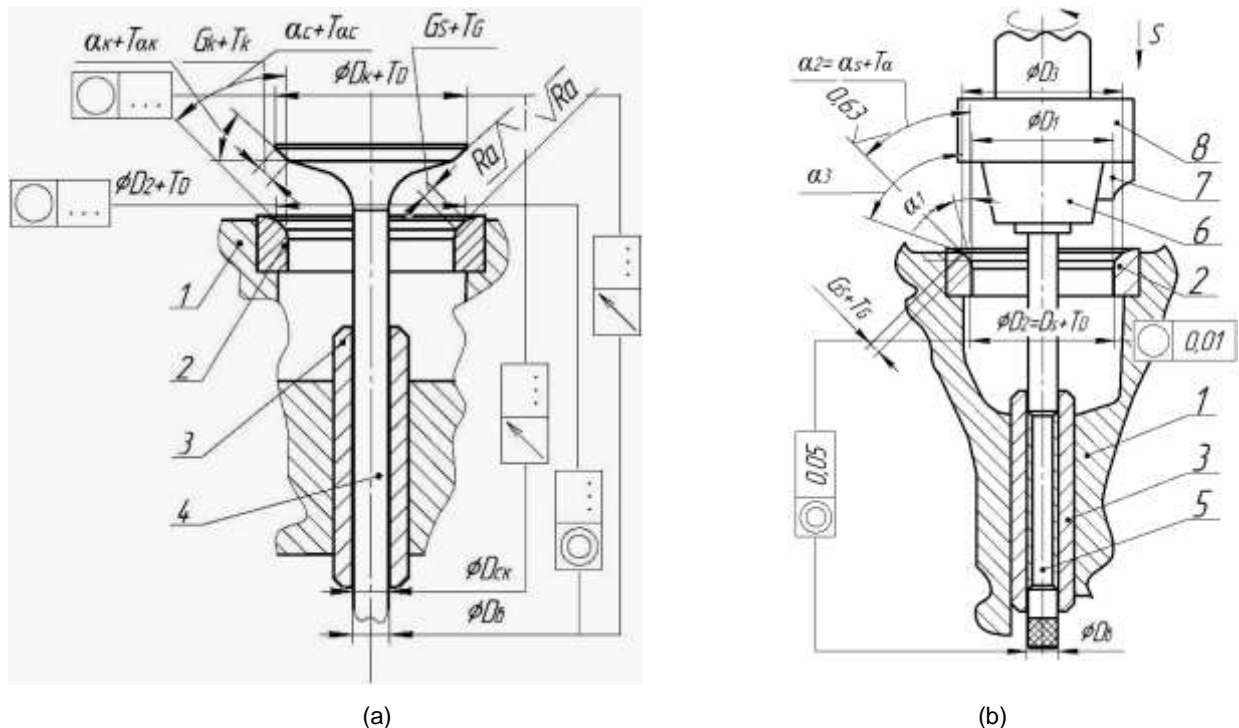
The quality parameters of the contacting surfaces in the conjugation bush-valve-seat (a), the scheme of the valve seat machining (b) / Параметры качества сопряжения поверхностей втулка-клапан-седло (а), схема обработки седла клапана (б): 1 – ICE body / блок ДВС; 2 – valve seat / седло клапана; 3 – valve bush / втулка клапана; 4 – valve / клапан; 5 – pilot / пилот; 6 – spindle / шпиндель; 7 – СТ / РИ; 8 – test element / контрольный элемент
